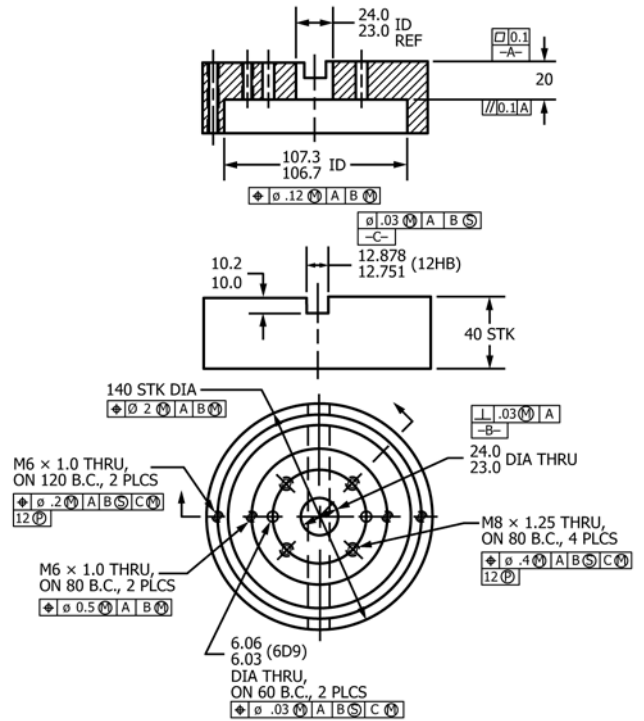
The Outer Shell of the Compression Fixture in Metric Units
